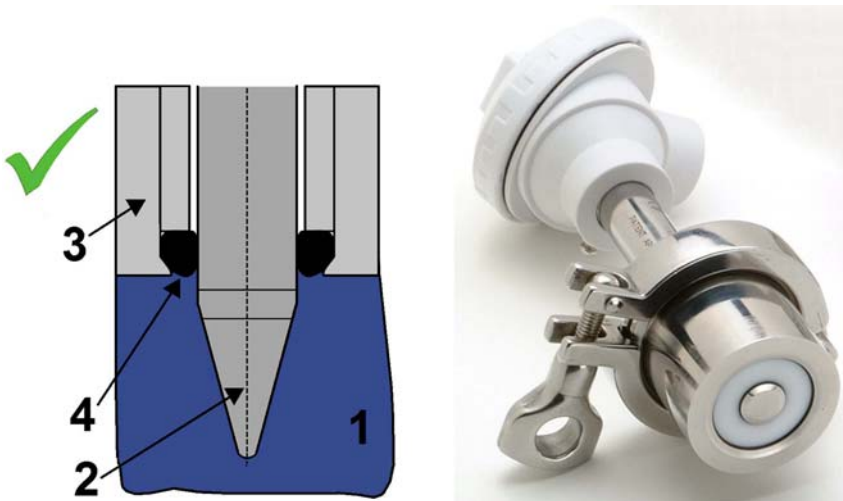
In the product area (1), a sensor (2) can be installed via a weld-in adapter (3) into and flush with the tank wall. The detachable seal joint (e.g., O-ring, 4) is almost completely enclosed with the surrounding metal protecting the non-product side from the product contact area (Lelieveld et al., 2003; Hauser et al., 2007) (photo, right, courtesy of Weed Instrument Co., Inc. d/b/a Ultra Electronics, Nuclear Sensors & Process Instrumentation).
